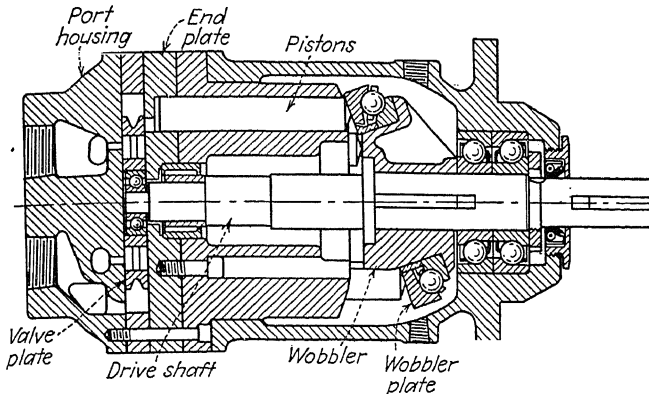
Axial-piston type of hydraulic motor employing a wobbler plate.
